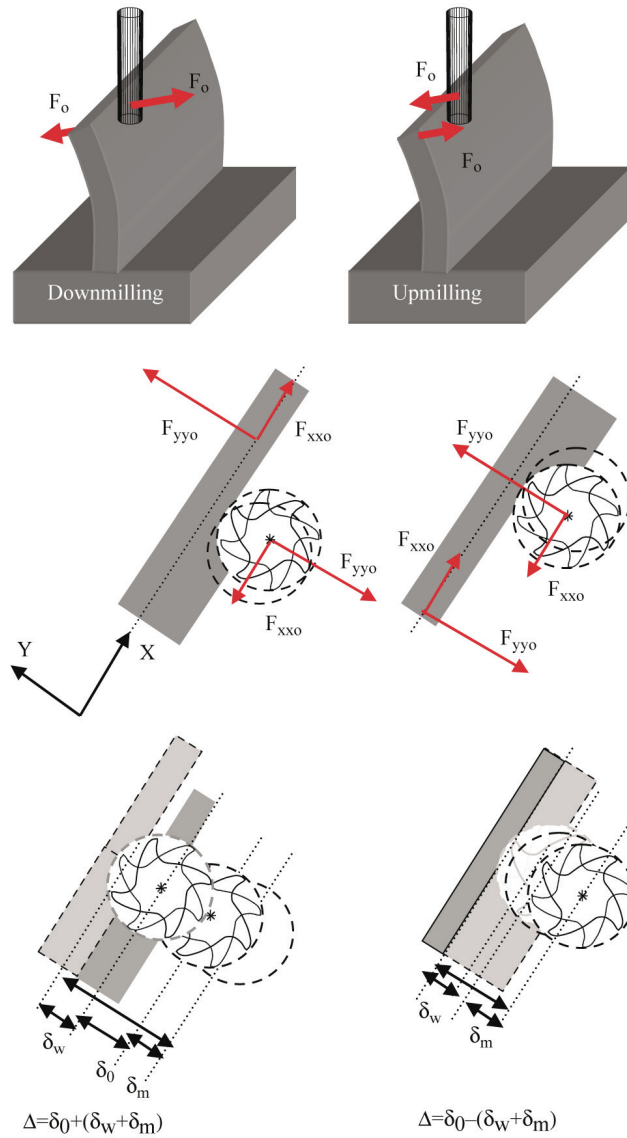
Dynamic coupling of machine tool system and workpiece (Bravo et al., 2005)
